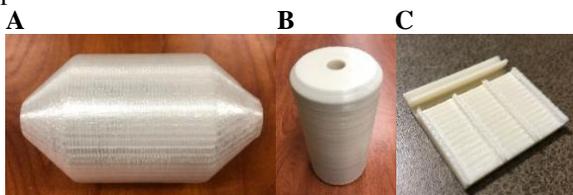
3D printed models (A) A single piece print that will allow for accurate pressure testing (B) A two piece print with a cavity through the middle for rope (C) A device to hold three solar panels in place that can be placed within different buoy designs
